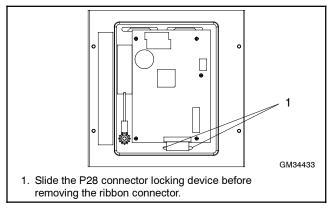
RSA Annunciator Panel and RSA Circuit Board (back view of front panel)
